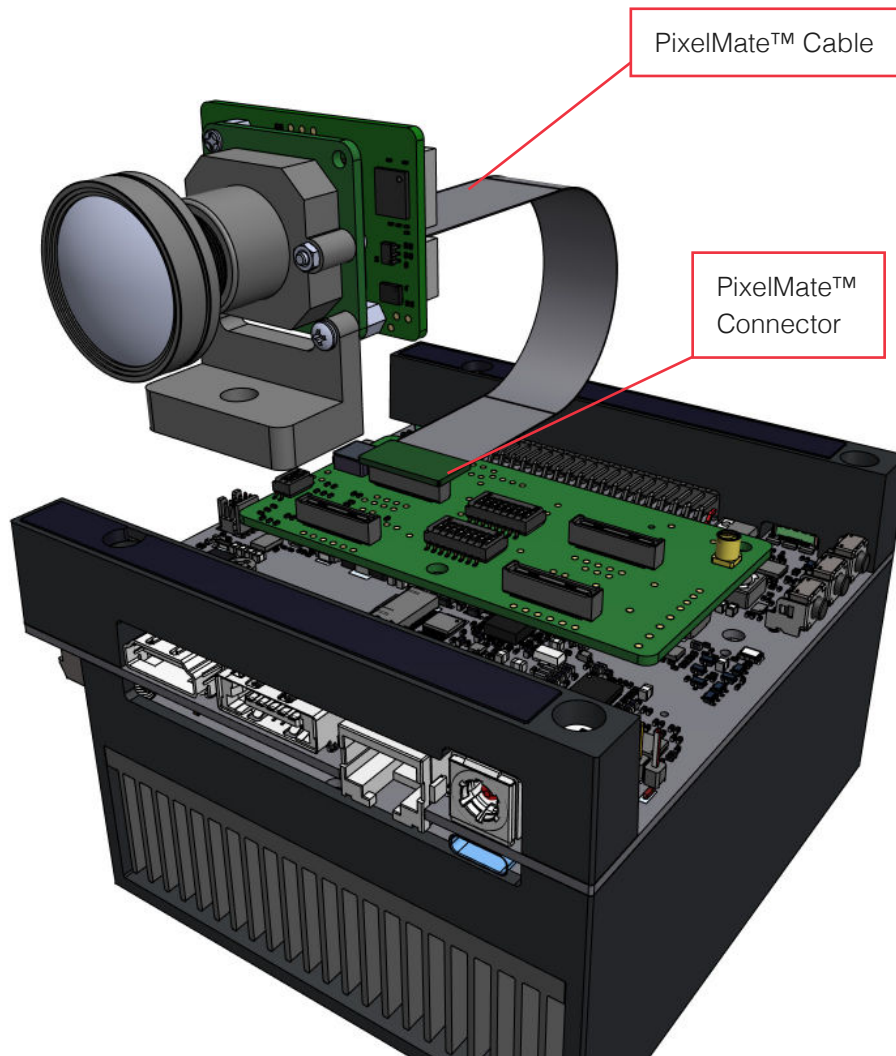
Assembled model view of the FSM-IMX636 Development Kit.
